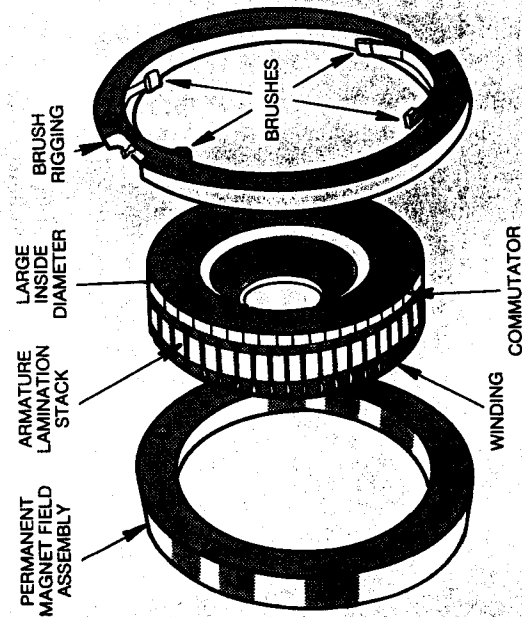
Details of a torque motor, showing hole for hollow-drive shaft mounting.
